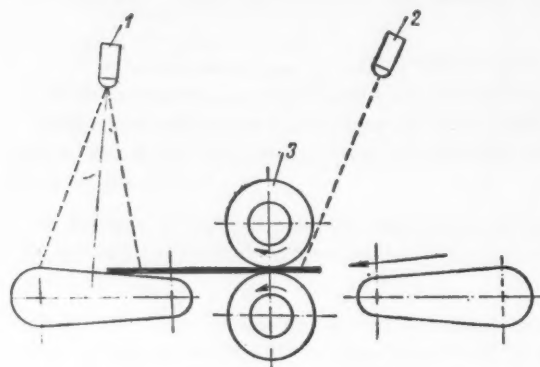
Arrangement of the base head of the automatic length gage: 1) Unit 6; 2) unit 5; 3) mill rolls.
